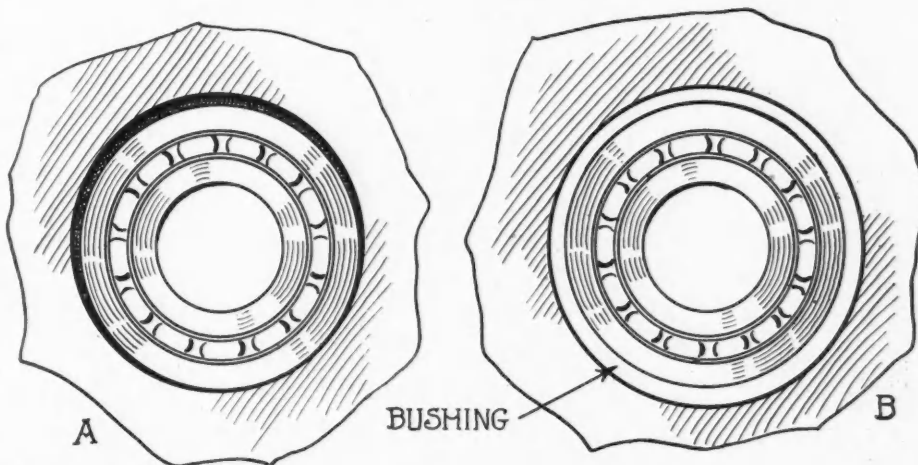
At A is shown the result of having the pilot bearing a running fit in the flywheel recess. The proper remedy in this case is to remove the flywheel, enlarge the recess for the pilot bearing and then fit a bushing, as at B
